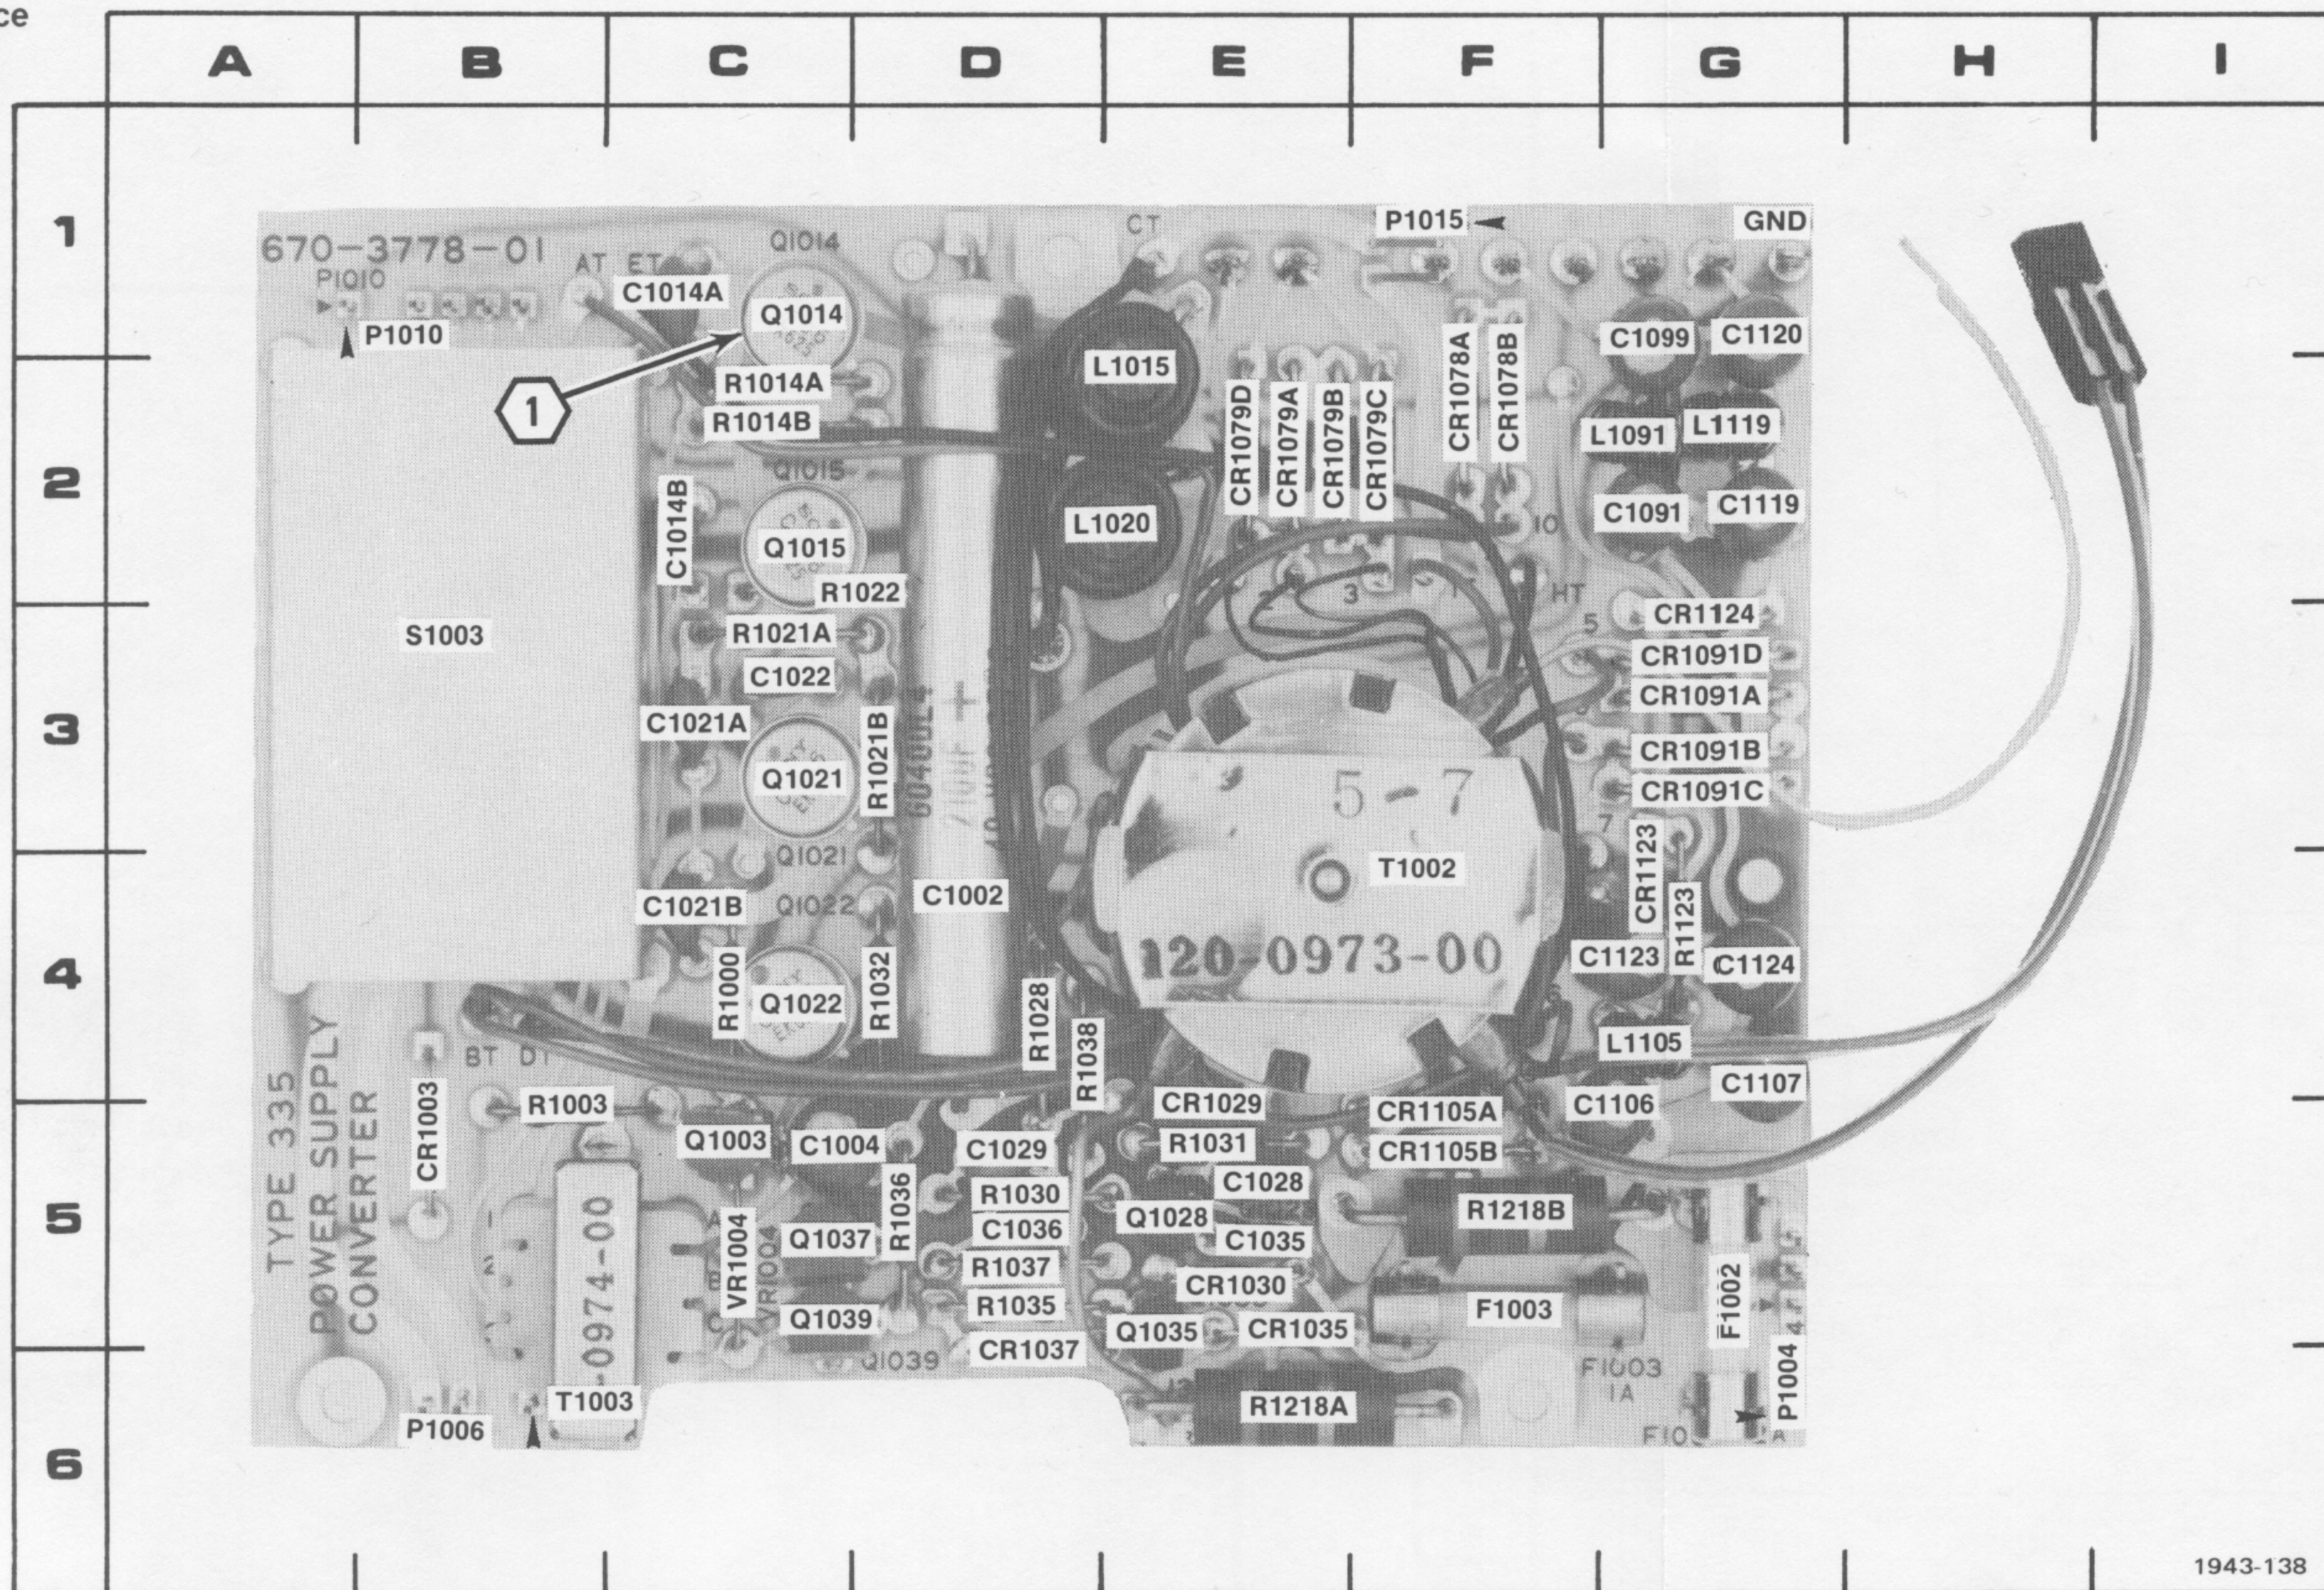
A8 Power Supply Converter board component locations, SN 300216-up.
